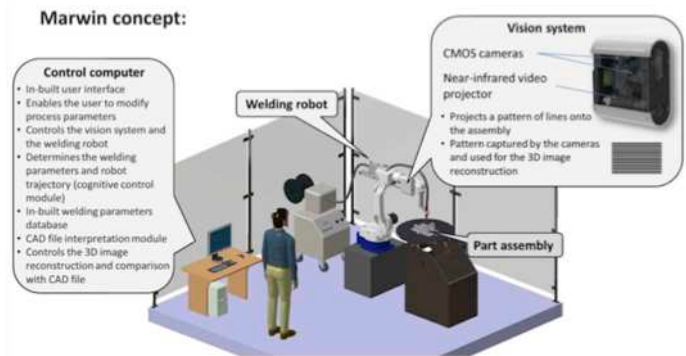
The MARWIN concept for intelligent robotic welding
